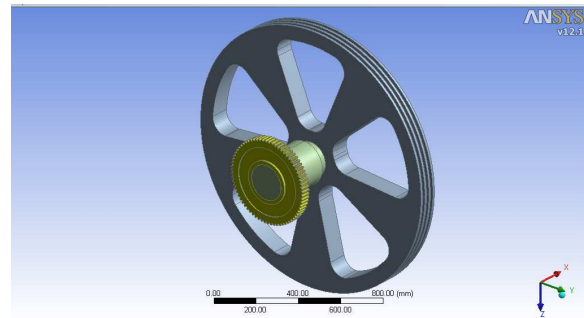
MODEL OF DRIVE SHAFT ASSEMBLY
